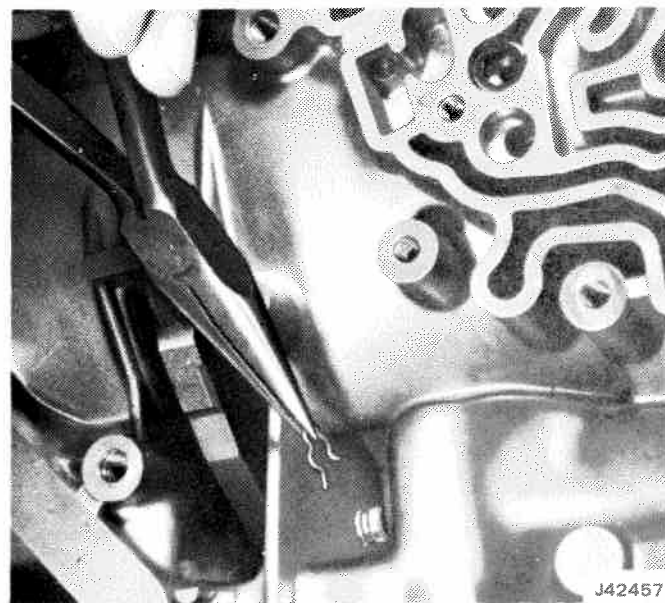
Removing-Installing Retainer Spring From Parking Pawl Shaft
